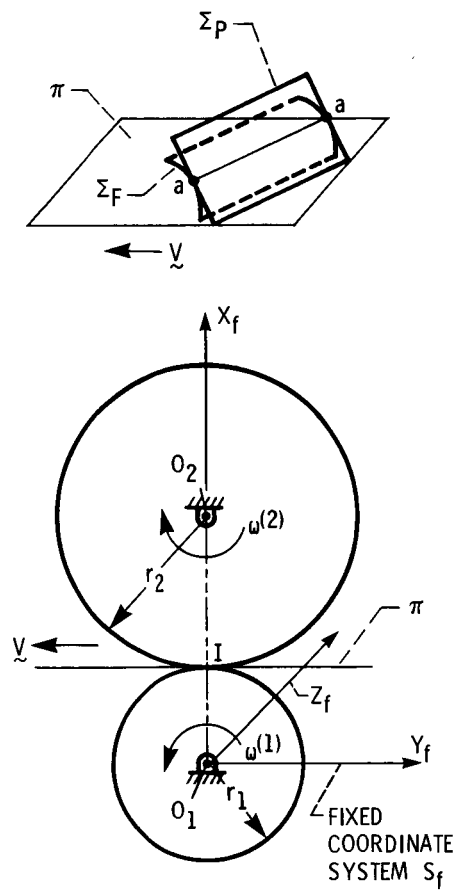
Generating surfaces for circular - arc helical pinion and regular screw involute.
